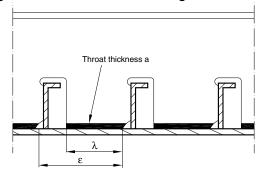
Intermittent scallop fillet welding between cut-outs
